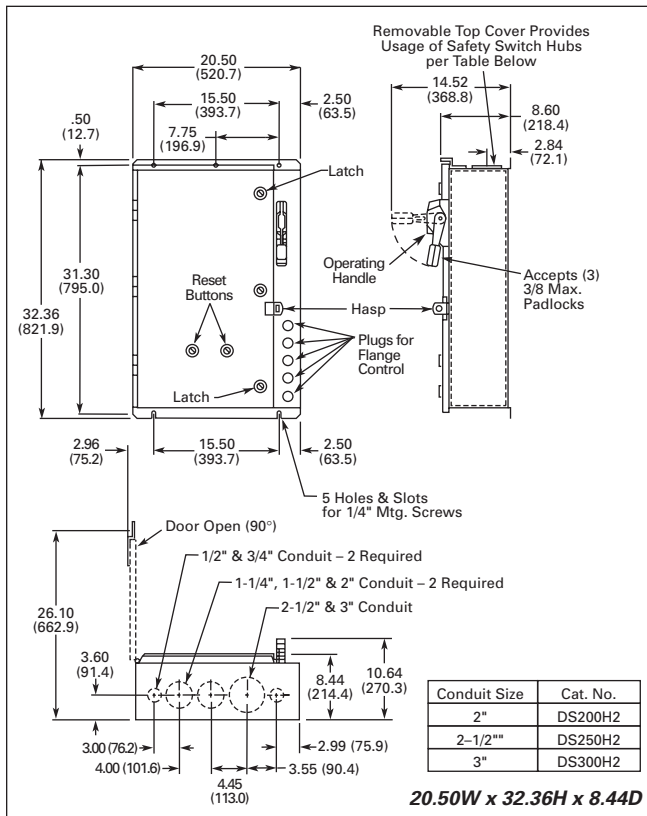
Box C, Type 3R — Approximate Dimensions in Inches (mm)
